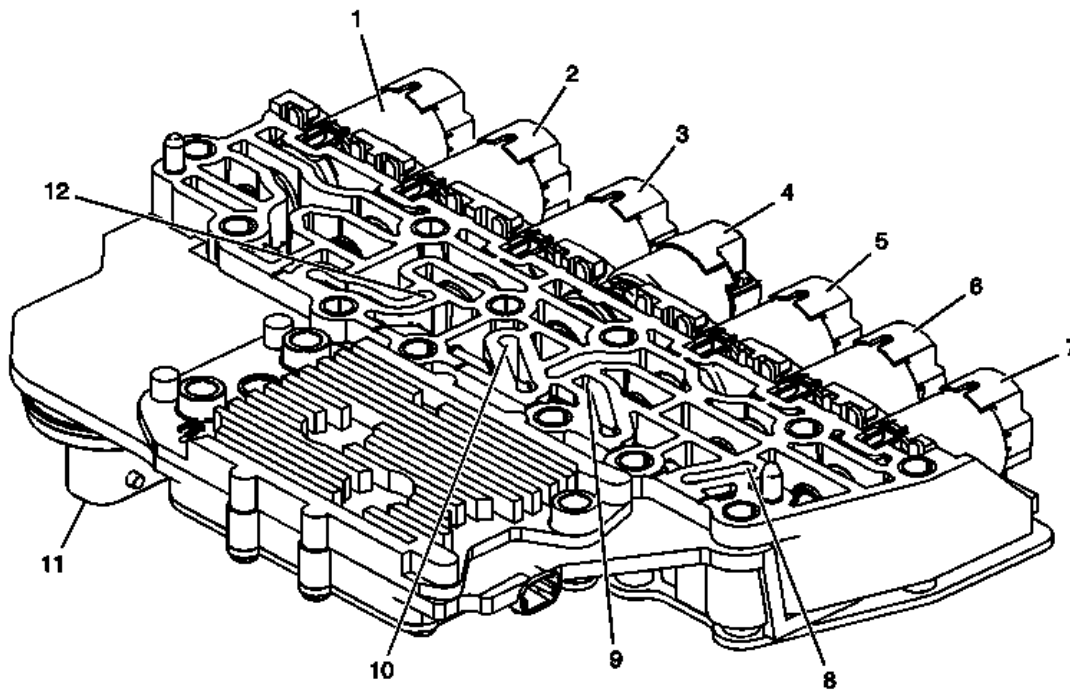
View Of Control Solenoid (W/Body & TCM) Valve Assembly
